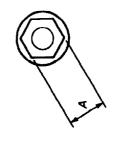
TYPE III — MINIATURE HANDLE NUT DRIVER
